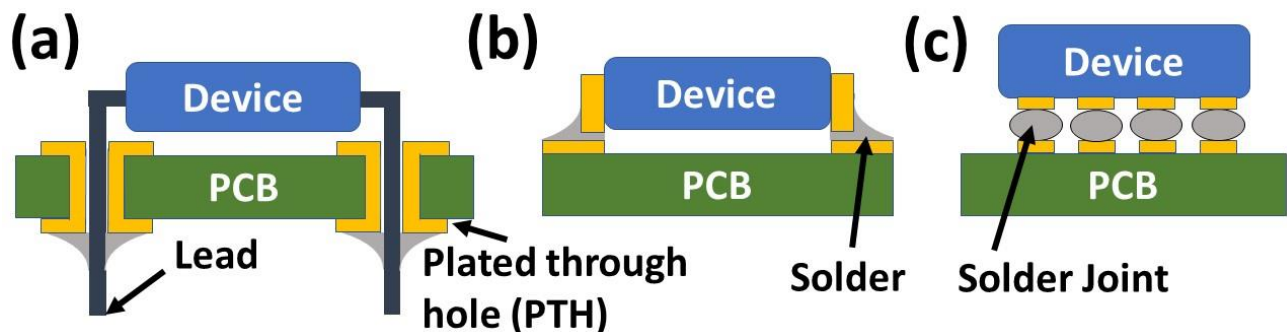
(a) Through-hole technology showing leads on bottom side of PCB, (b) surface mount technology showing connection of device directly on PCB, (c) flip chip configuration showing series of solder joints.
